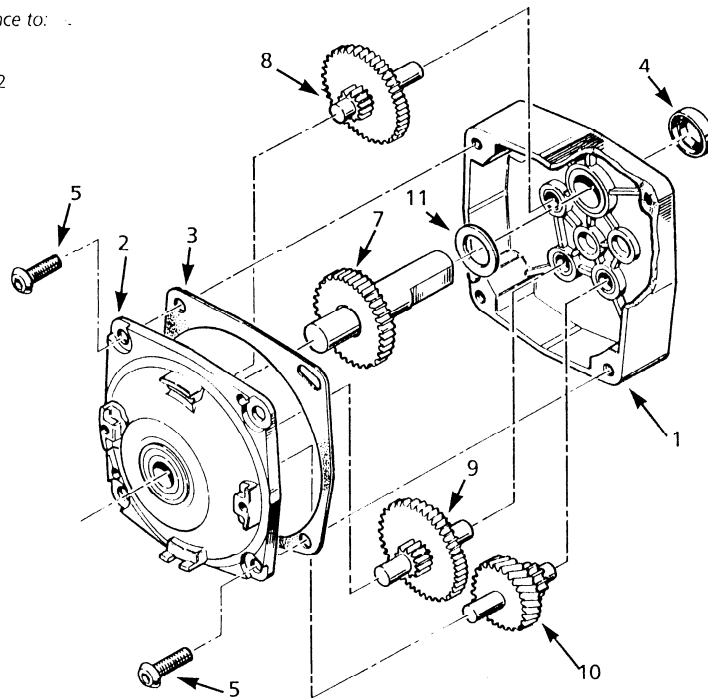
Gearbox Replacement Parts Illustration for Models 4Z062A and 4Z063A
